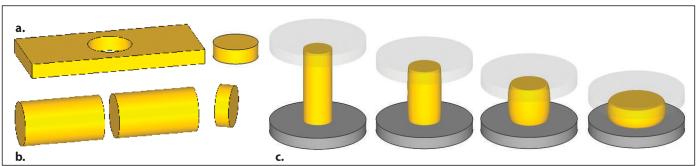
A simple cylindrical workpiece can be cut from a rolled plate (a); cut from an extrusion (b); or produced by the upset of a taller cylinder (c).
